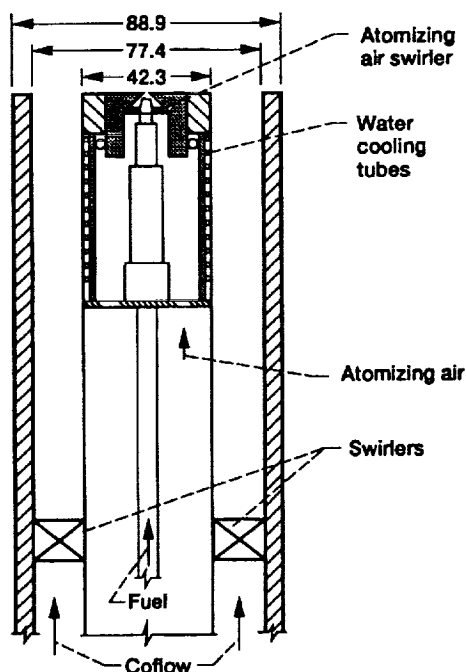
Schematic drawing of the combustor. Dimensions in mm.
